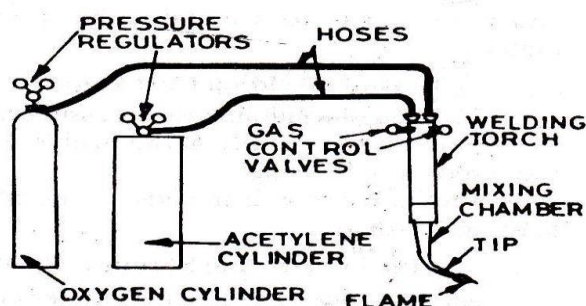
Oxy-acetylene welding equipment
